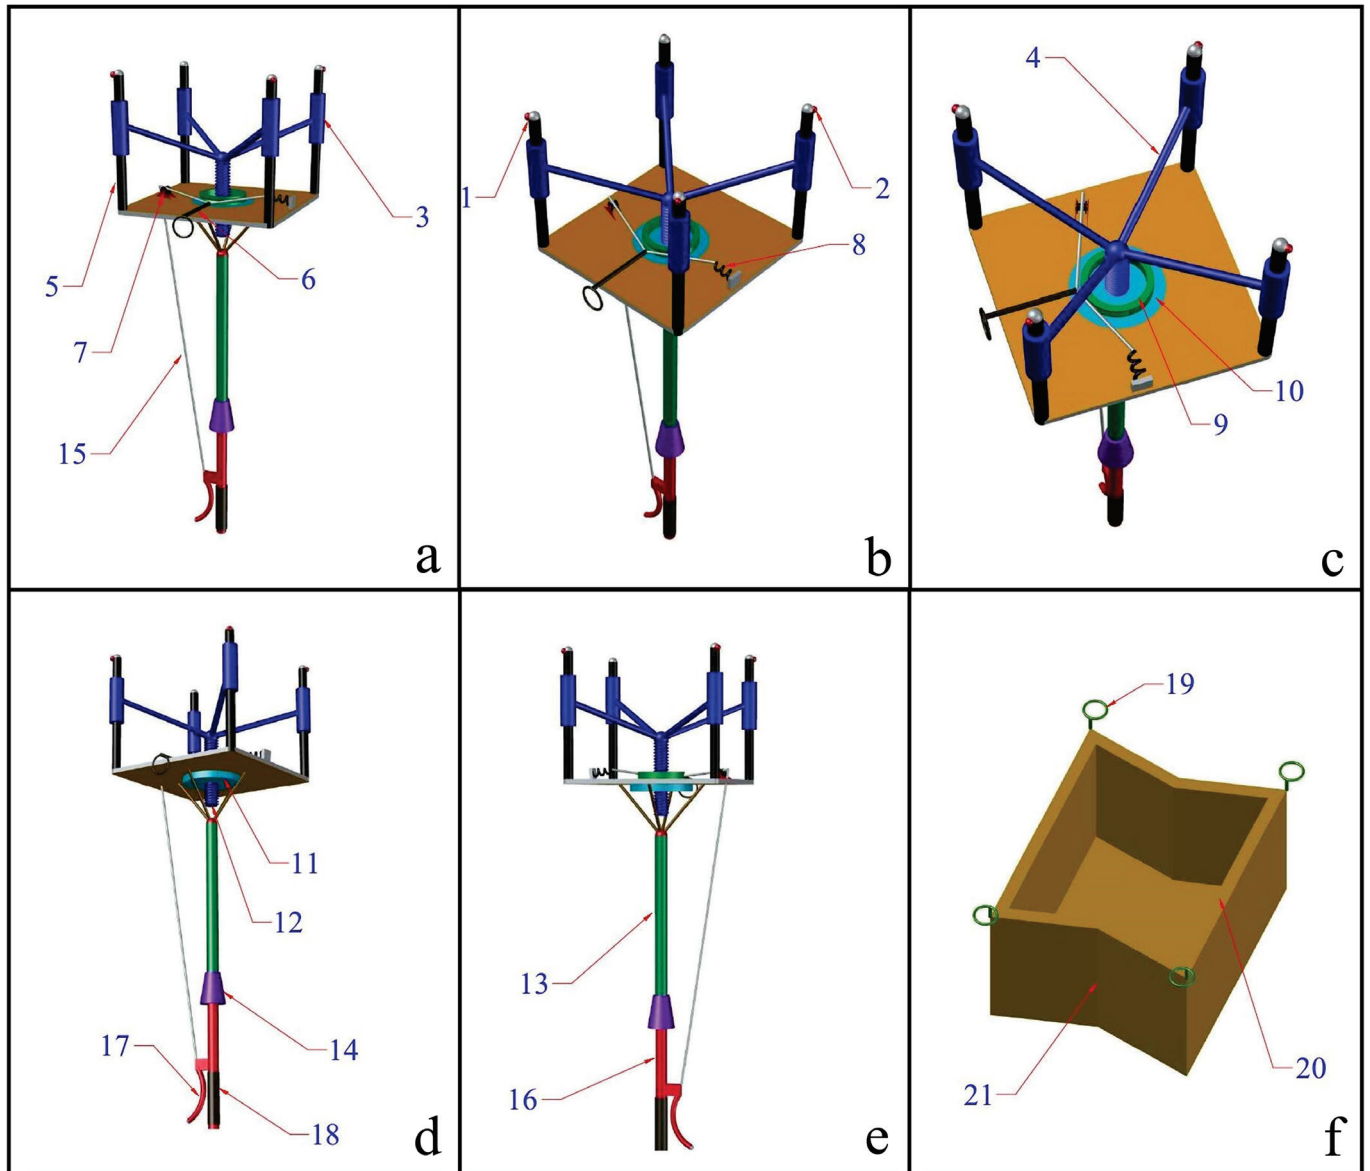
The 3D design of the fruit bagging apparatus: (a-e) demonstration of apparatus in different parts; (f) demonstration of paper bag
